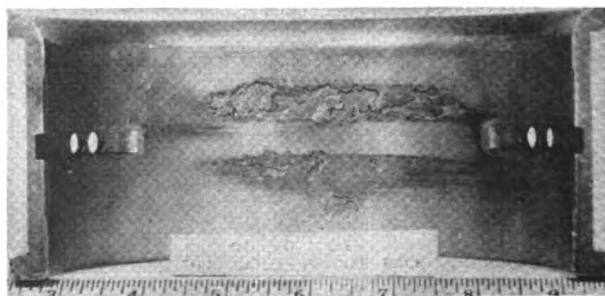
Failure due to extrusion of bronze back into the connecting rod oil groove.
